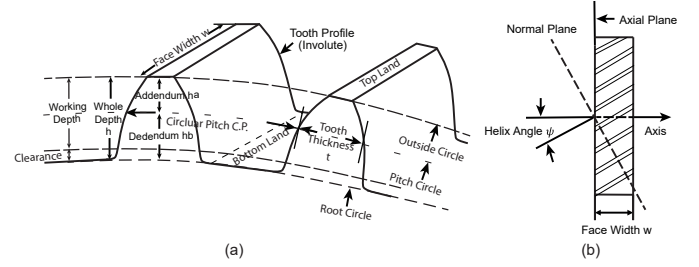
Nomenclature illustration for spur gear and helical gear. (a) A spur gear. (b) The side view of a helical gear.
